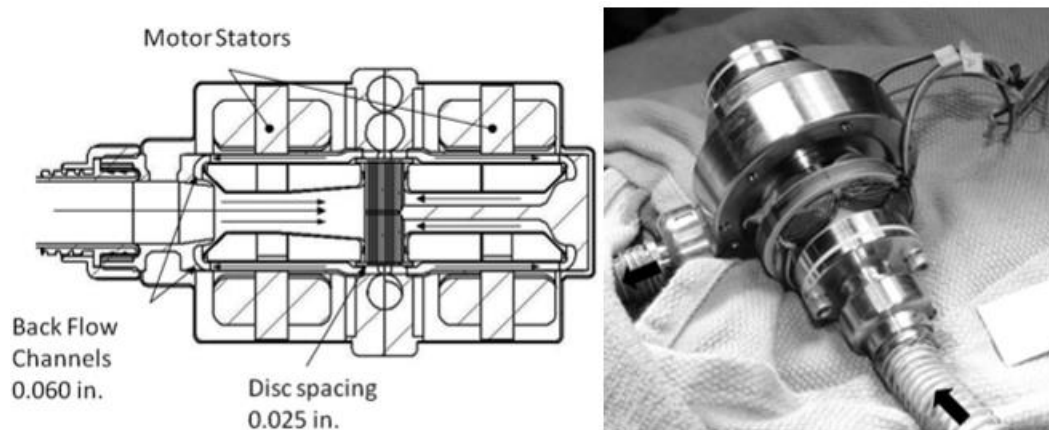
Cross sectional schematic drawing of the motor and pump design (left), tesla blood pump (right) (Copyright of Izraelev et al. [30])
